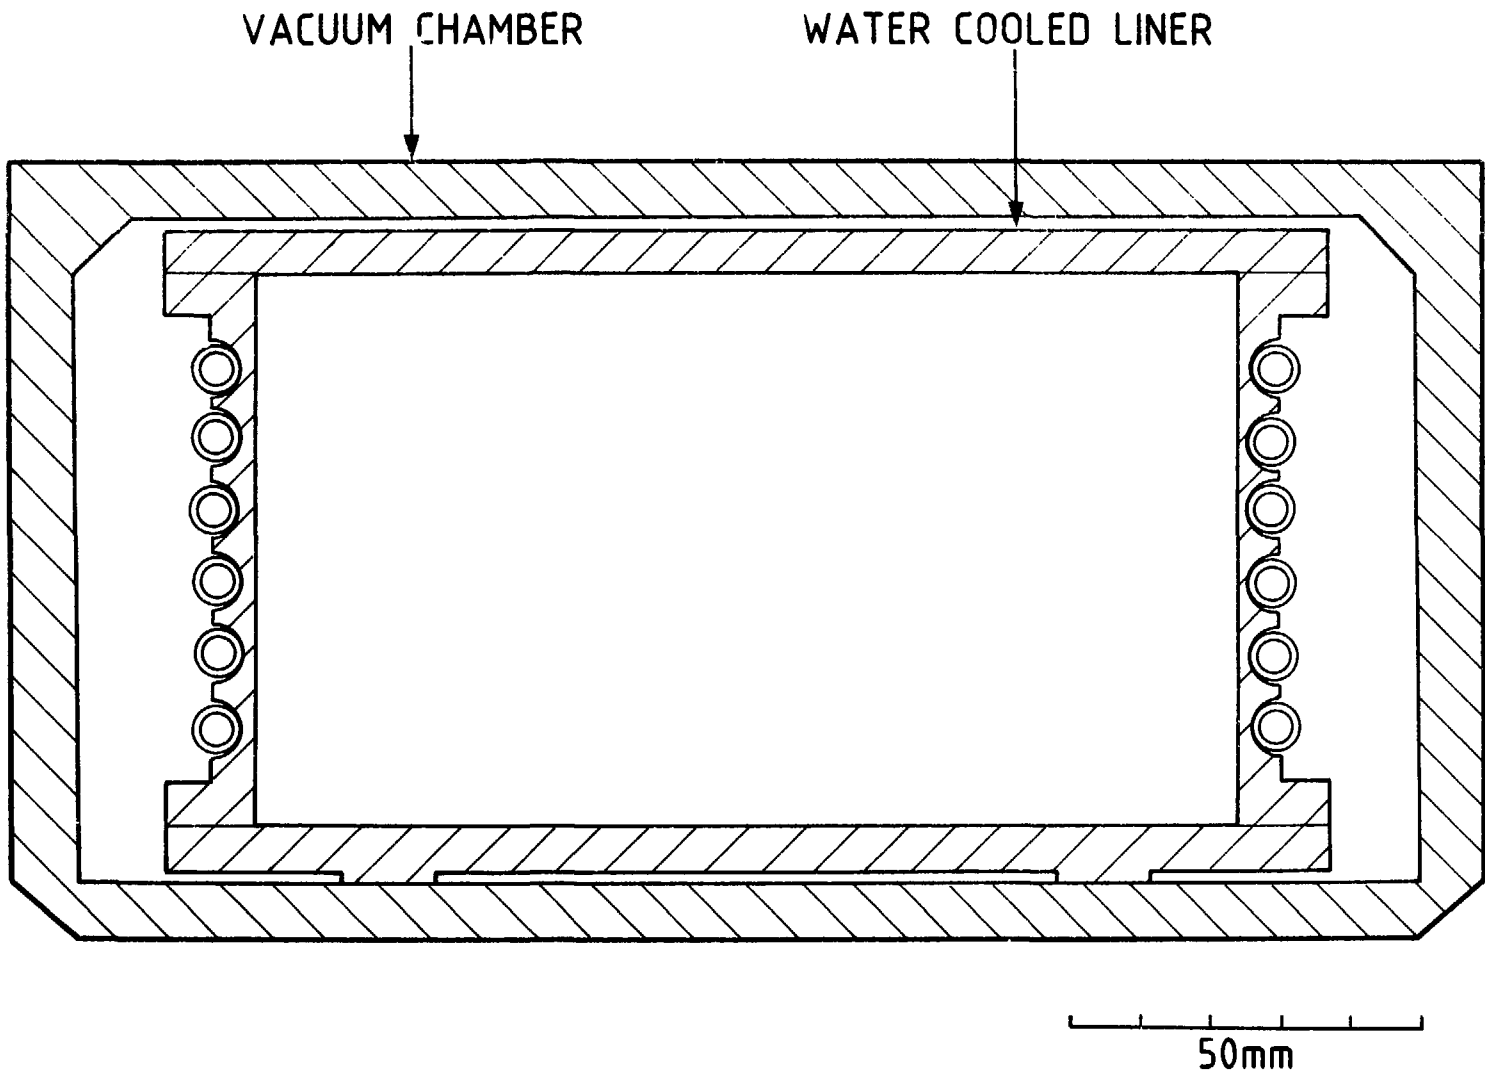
Typical cross-section of vacuum chamber with water cooled liner.
